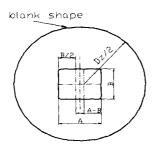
Blank shape used for elliptically shaped deep drawing products
